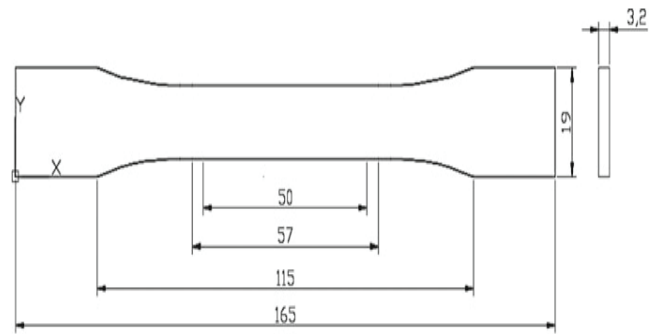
2D CAD model of specimen (ASTM D638 Type 1)
